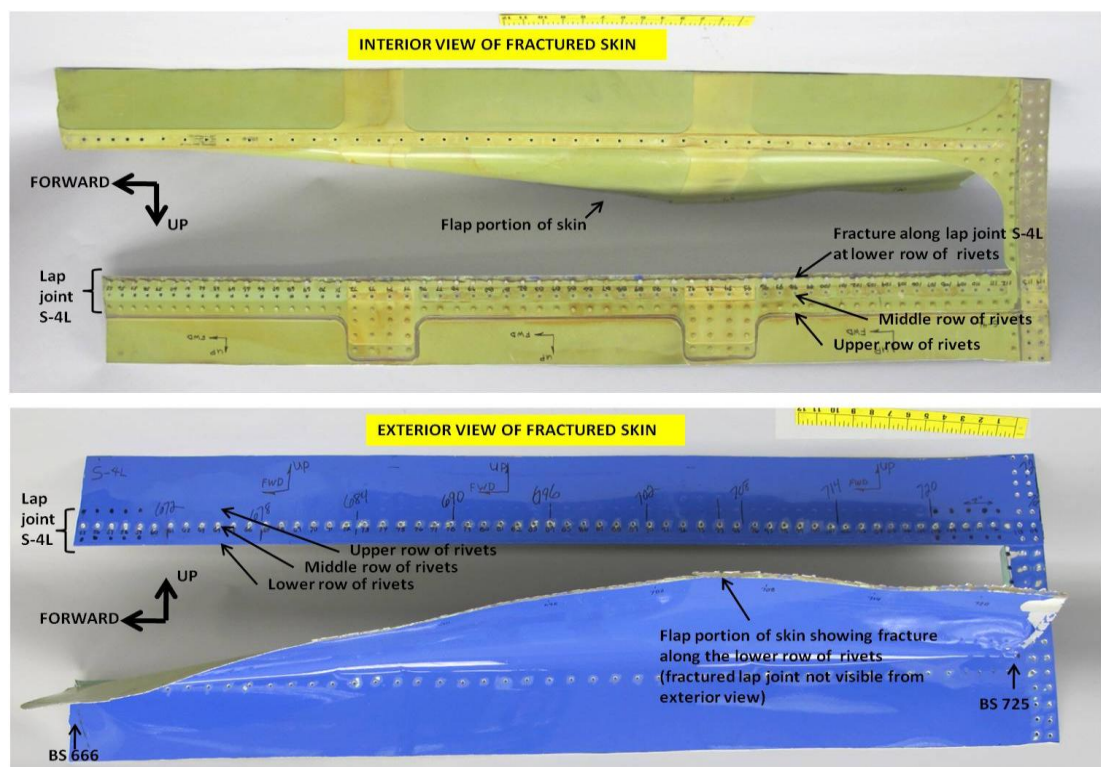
Fractured Skin of the Boeing 737-300 [17]
